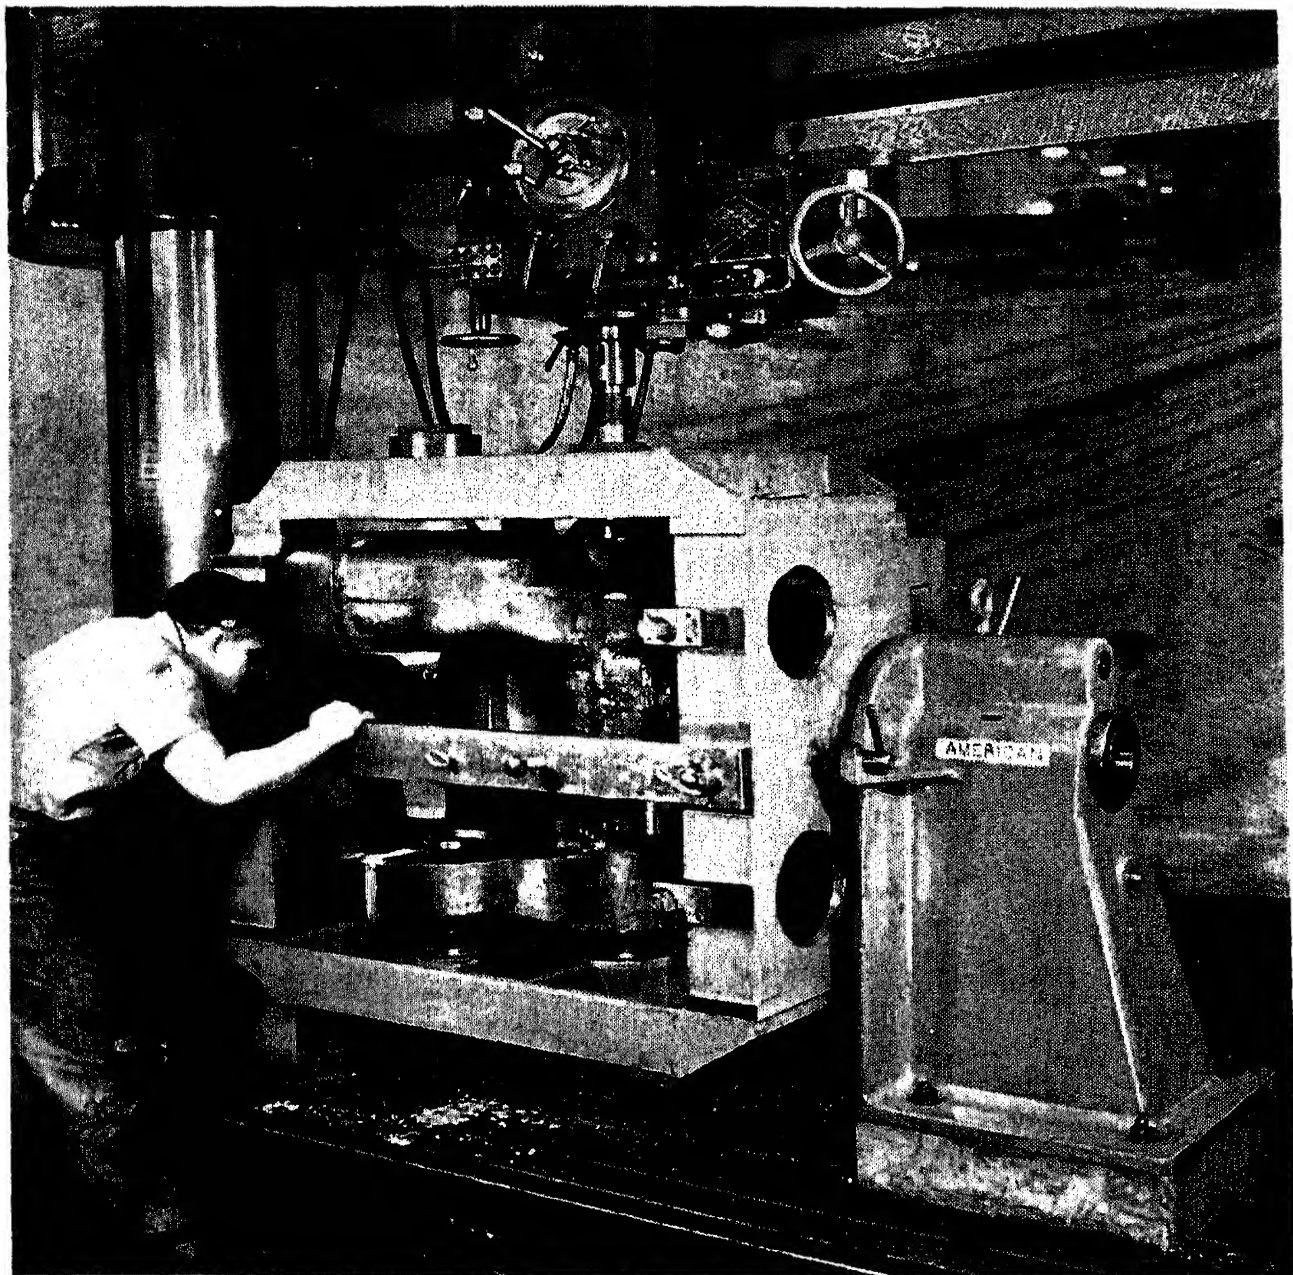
A trunnion jig on a radial drill press for drilling and boring a heavy transmission frame. (Courtesy American Tool Works Co.)
